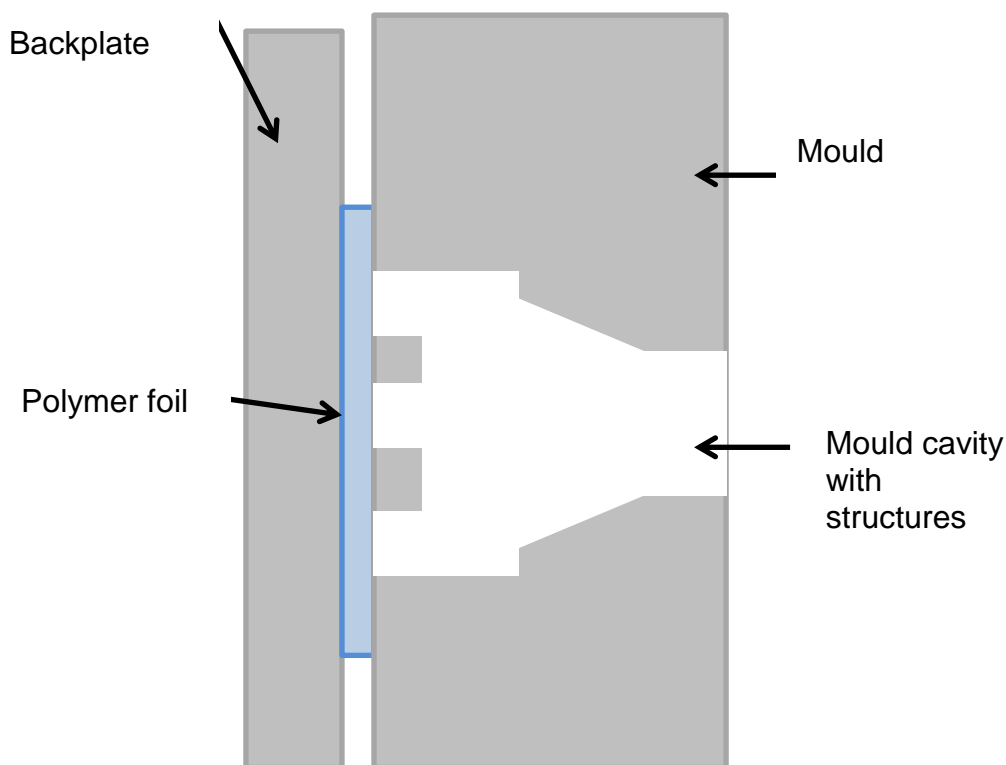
Injection moulding machine set up for overmoulding foil to microfluidic structures
